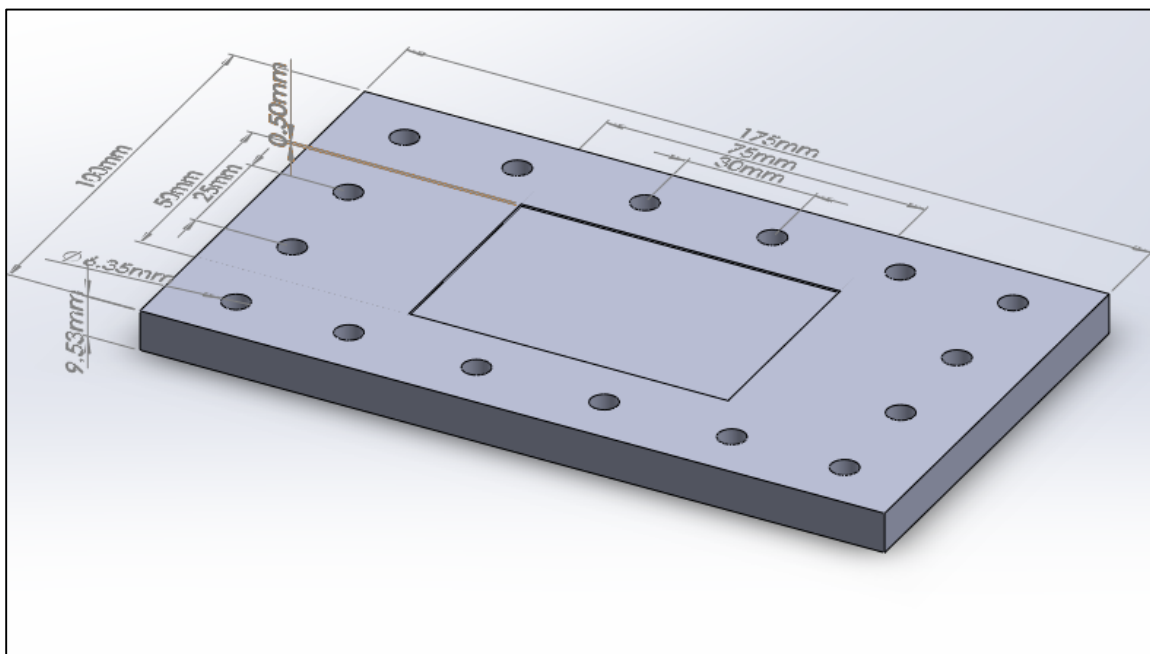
SolidWorks drawing of the PC flow cell base plate.
